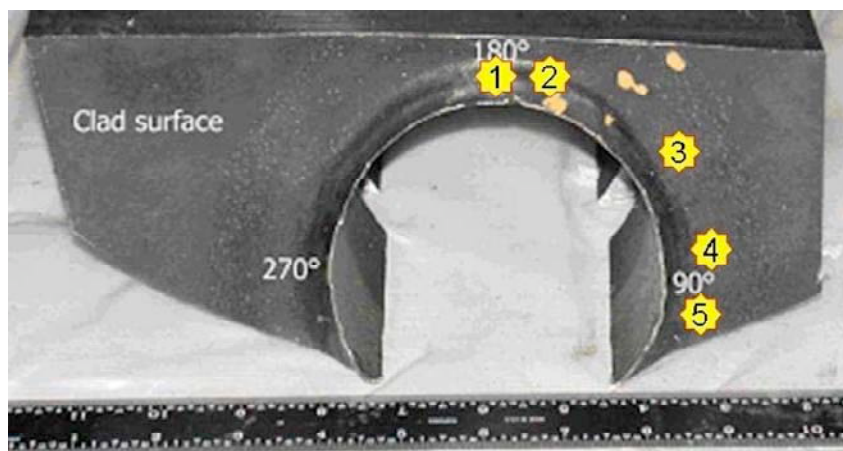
Approximate locations where defects were found during fabrication of test specimens from CRDM Nozzle #11 J-groove weld.
